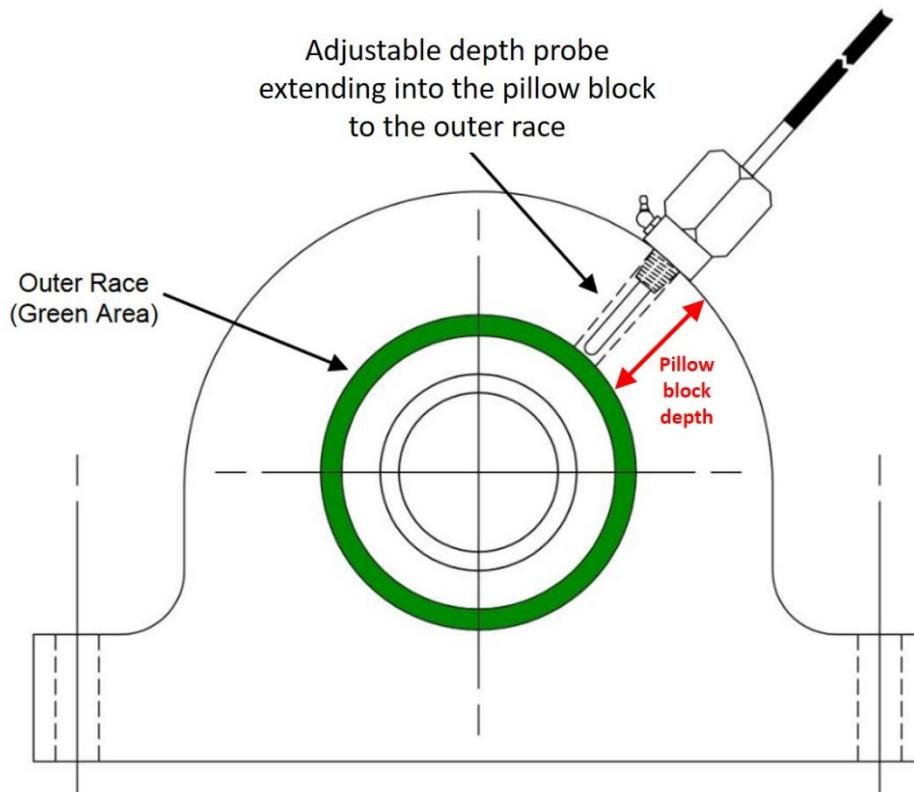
Adjustable depth probe temperature sensor installed on a pillow block bearing.
